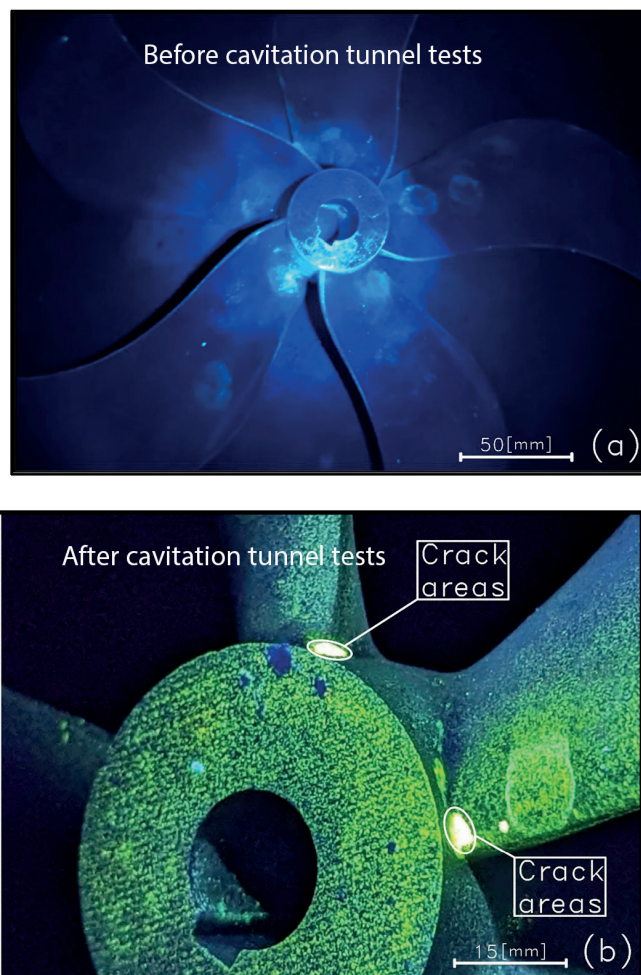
Cracks detected in the penetrant test (a) before the test, (b) after the test
